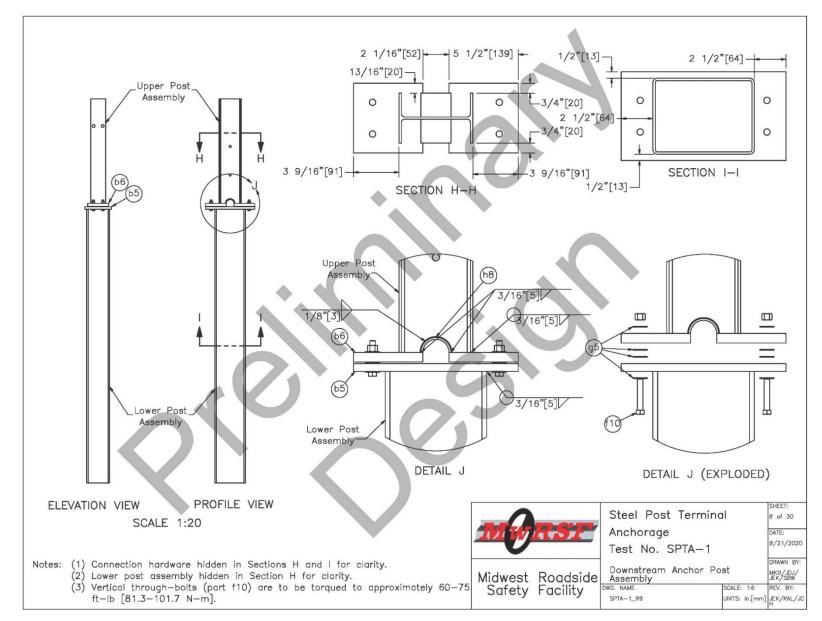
Downstream Anchor Post Assembly, Test No. SPTA-1
